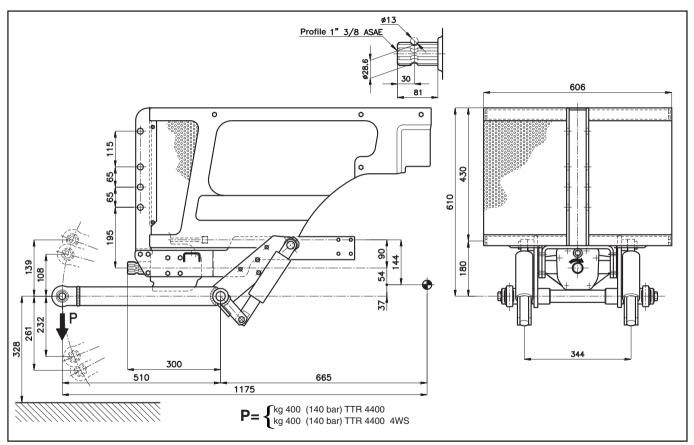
Dimensions of hitch and PTO flanging, with 6.50 - 16 wheels
